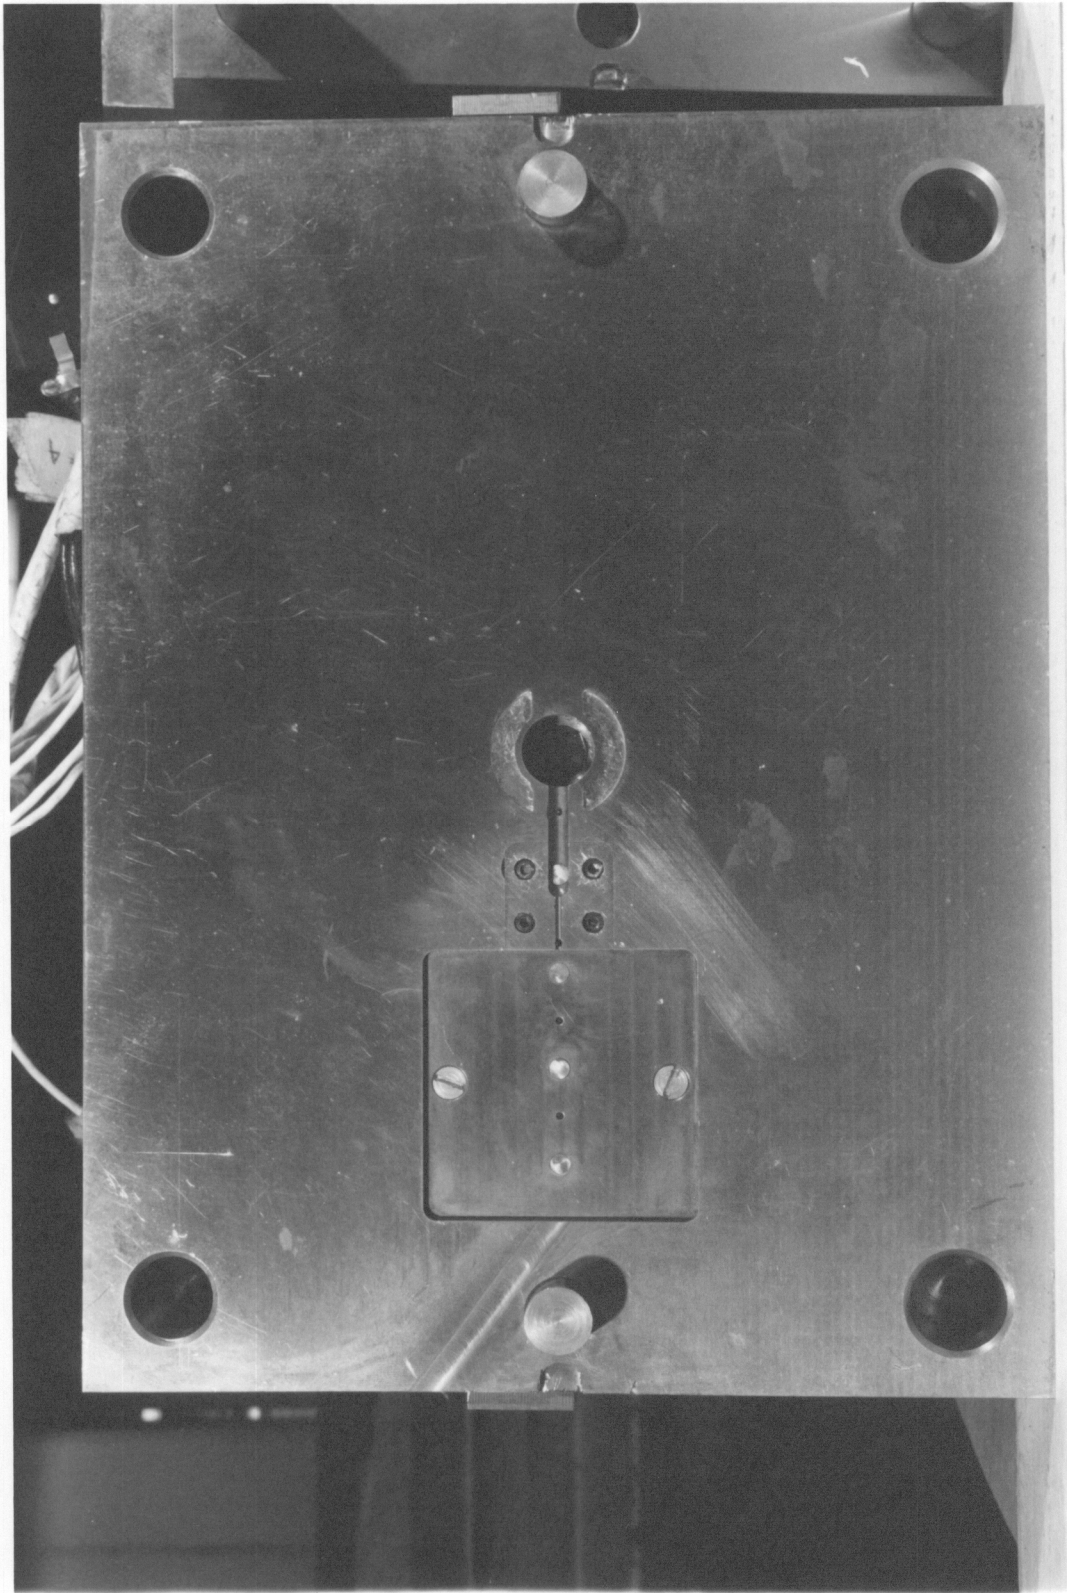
BOTTOM CAVITY PLATE OF THE INJECTION MOLD
